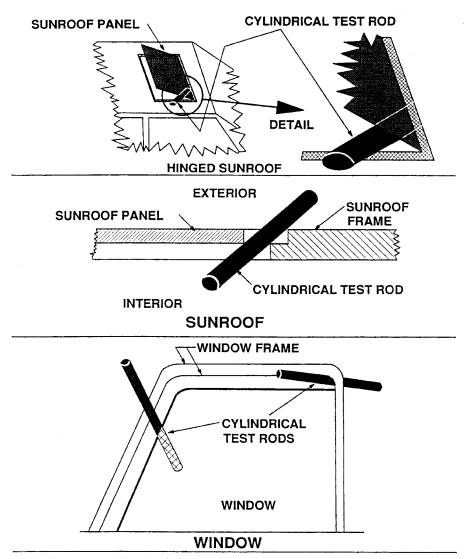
Typical Cylindrical Test Rods Protruding through Sunroof and Window Daylight Openings
